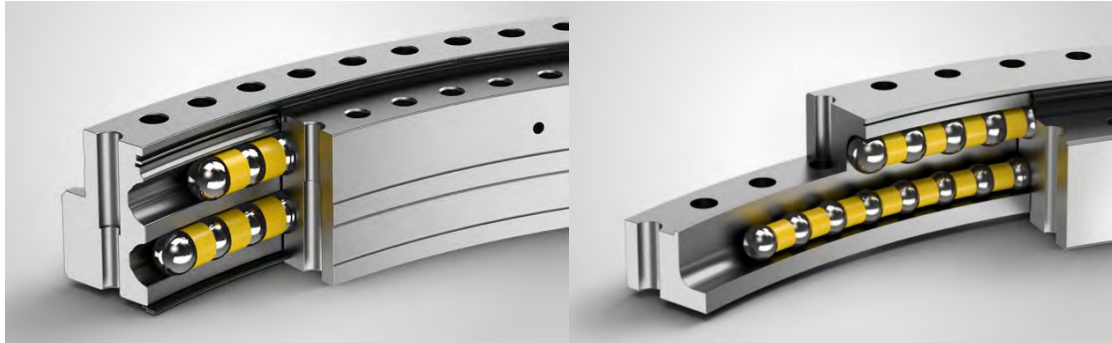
Two-row four-point contact wire race slewing bearing (left) and double-row angular contact slewing bearing (right) [39].
